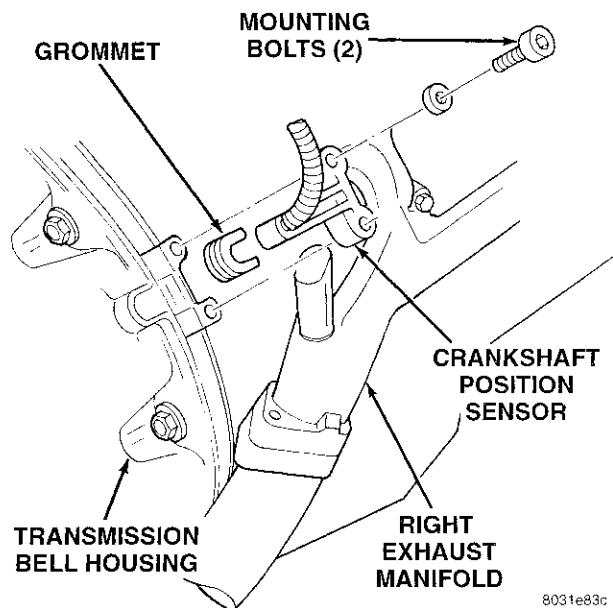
Crankshaft Position Sensor—Except 5.9L HDC Engine
